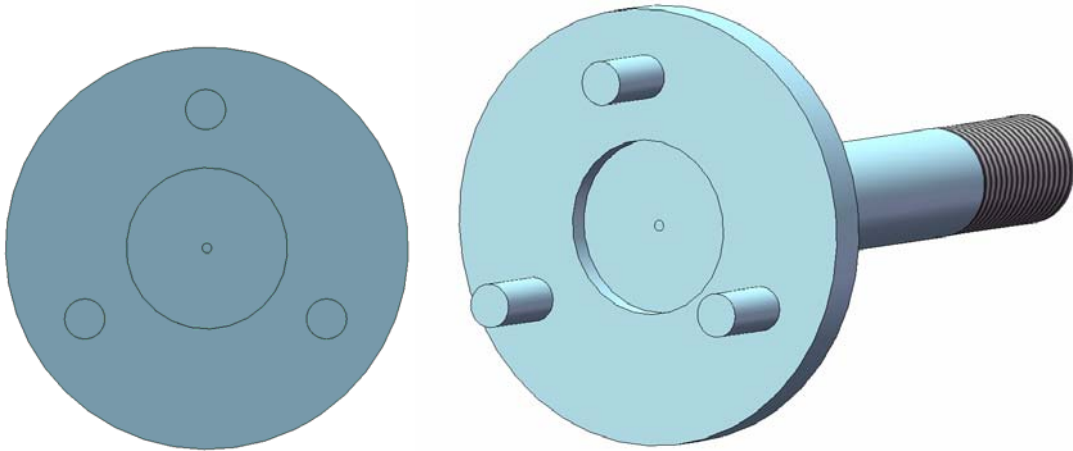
The carrier of a planetary gear train with the sun gear and ring gear hidden
